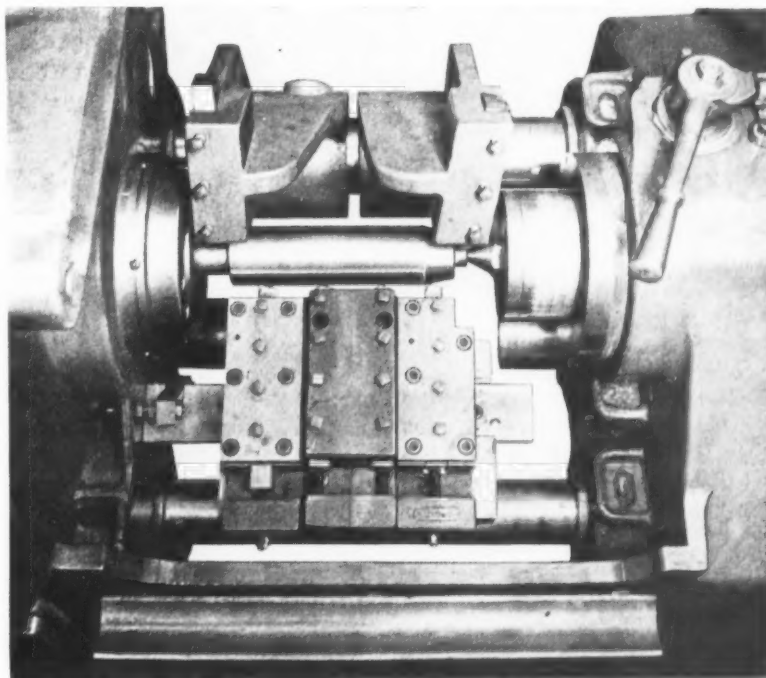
The 3-inch Size of Shell-turning Machine Toolled up for Rough-turning and Facing the Ends of 75-millimeter Shells Simultaneously
